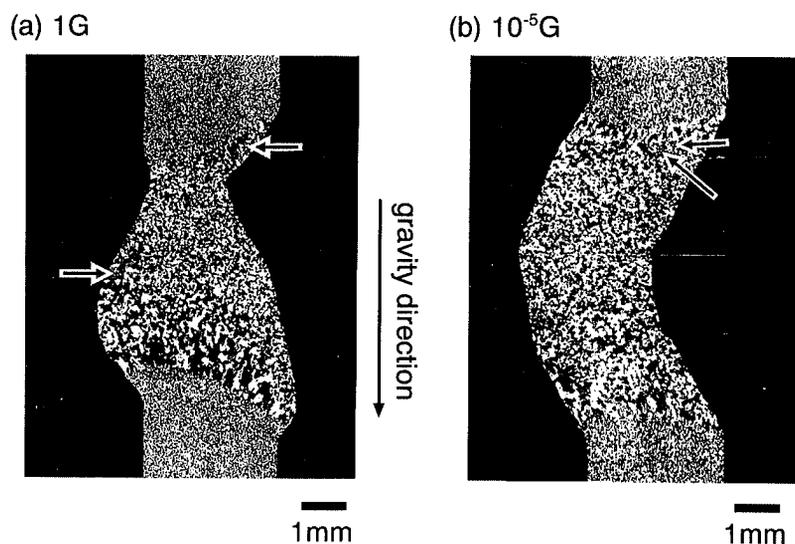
Transverse sections of butt welds in horizontal welding with argon shielding gas. The arrows indicate the pores.
